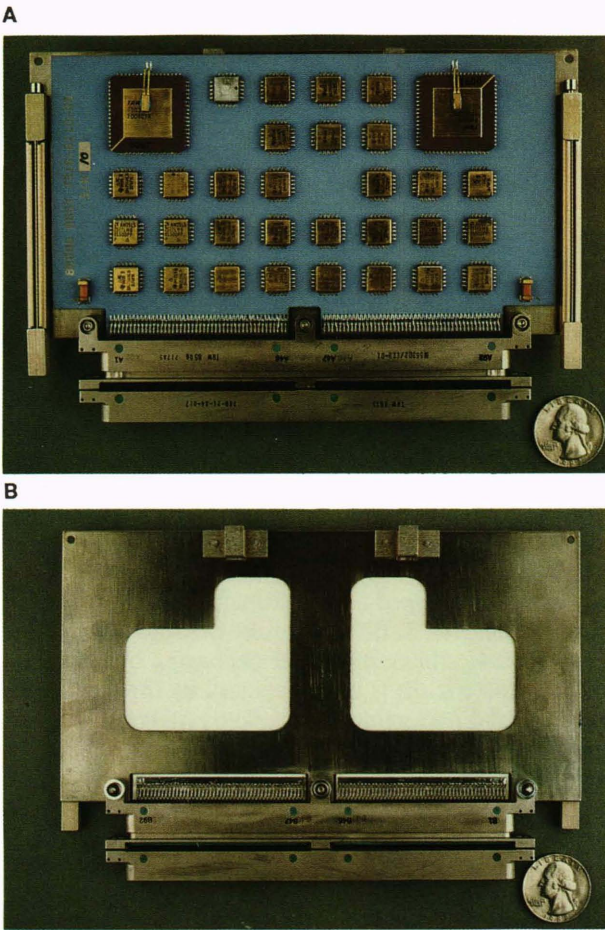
High-density surface-mount board assembly. A. Leadless chip carriers on multilayer ceramic board. B. Copper-clad Invar heat sink.
